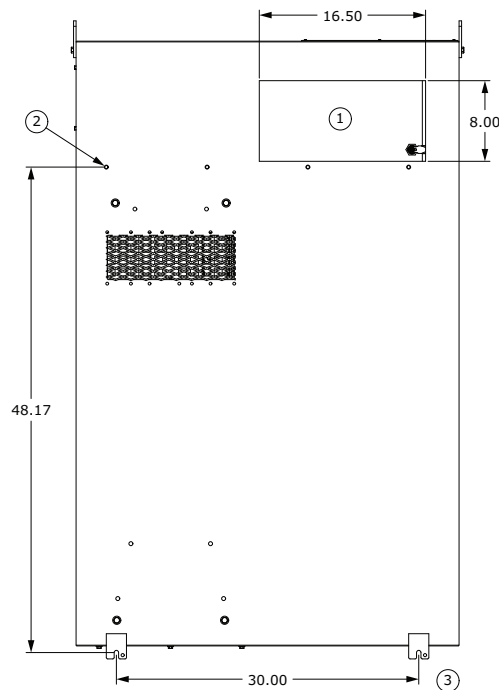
Rear view of D-Frame AFDH cabinet with dimensions (direct mount)
